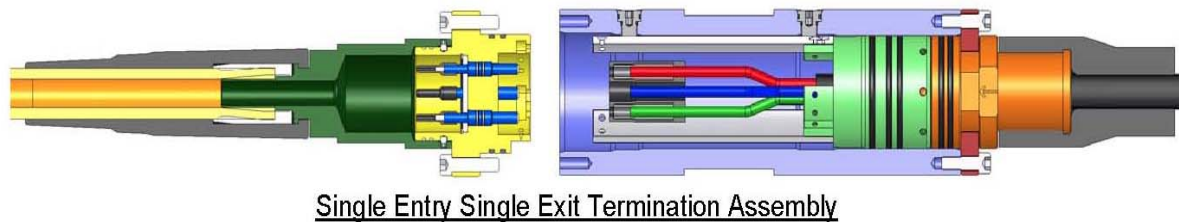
FACT G2 Assembly Factory vs Field Assembly and Testing
